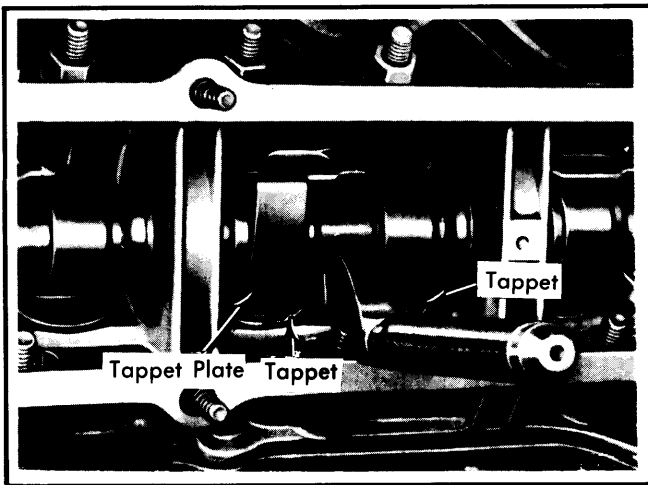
Using Special Tool to Remove Valve Tappet Plate
